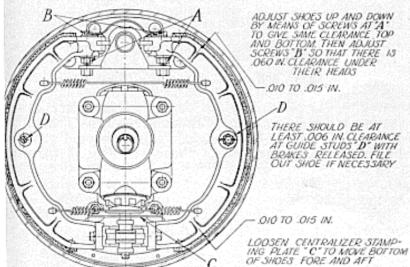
Front brake assembly showing the two centering adjustments and clearances
